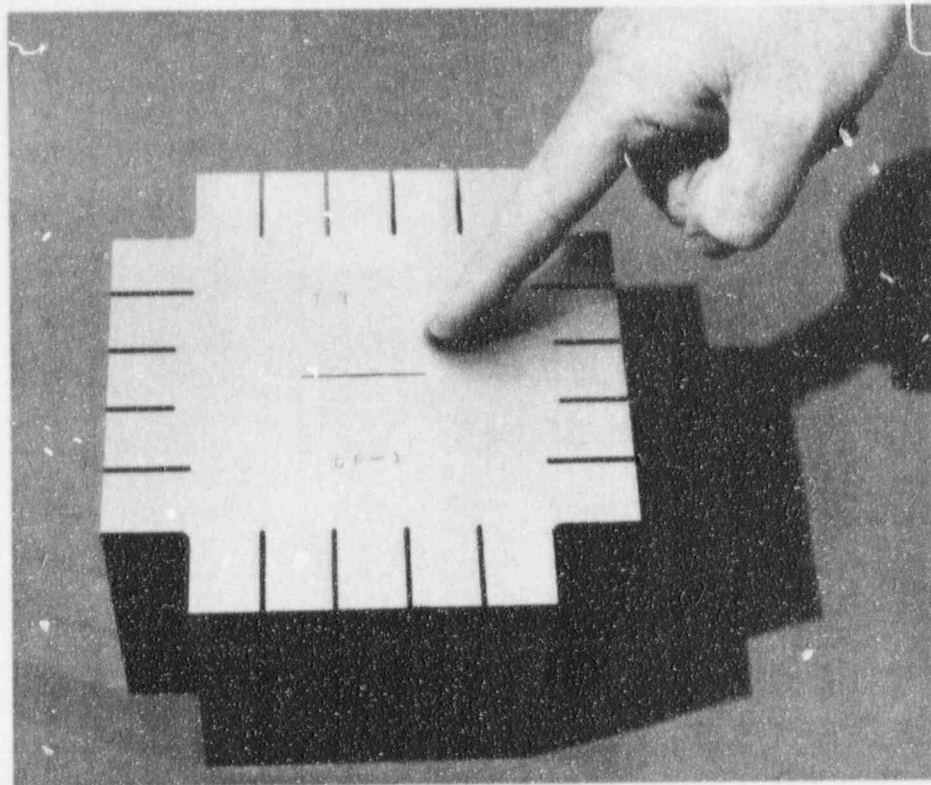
Overview of finite-length flaw test section showing details of test flaw and pattern of LDCSS
